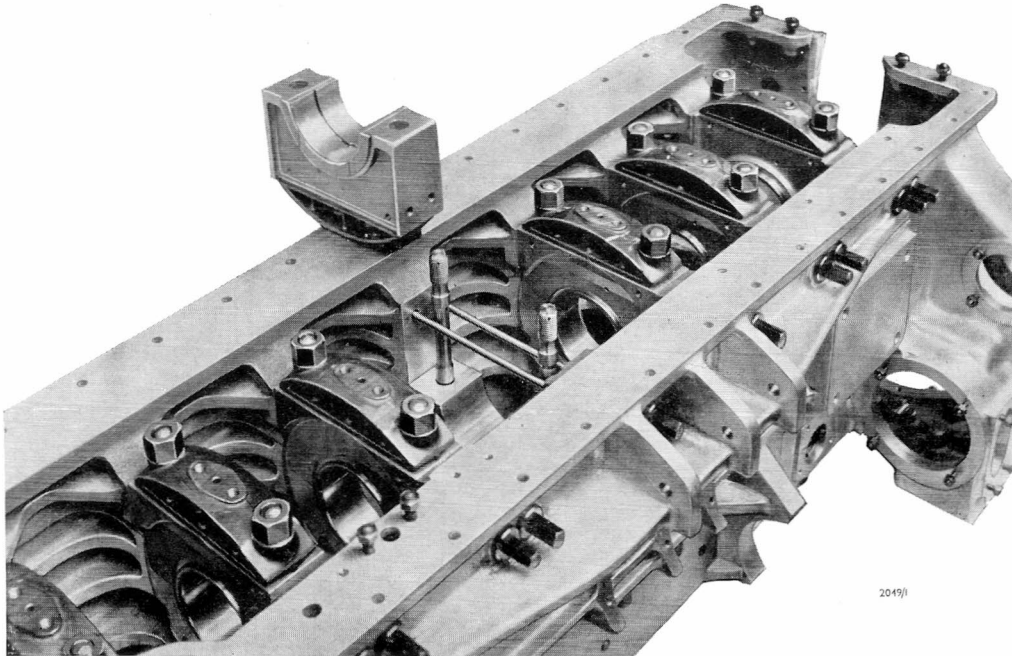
Crankcase fitted with Bronze Shell Main Bearings
